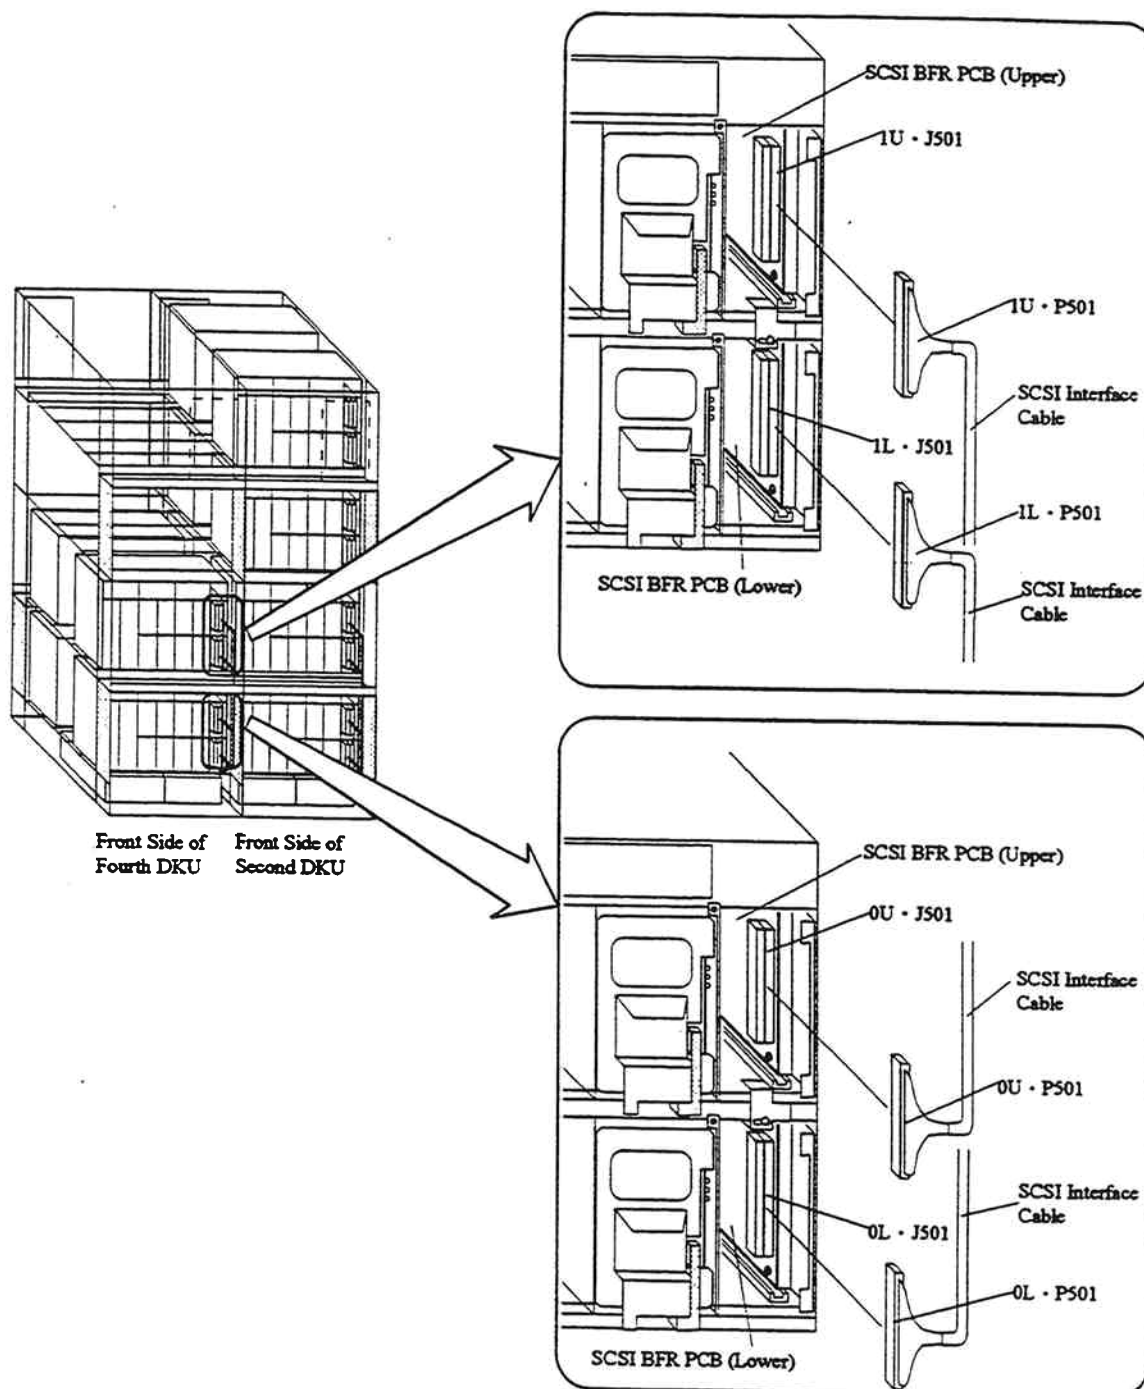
Disconnection of the SCSI Interface Cables
